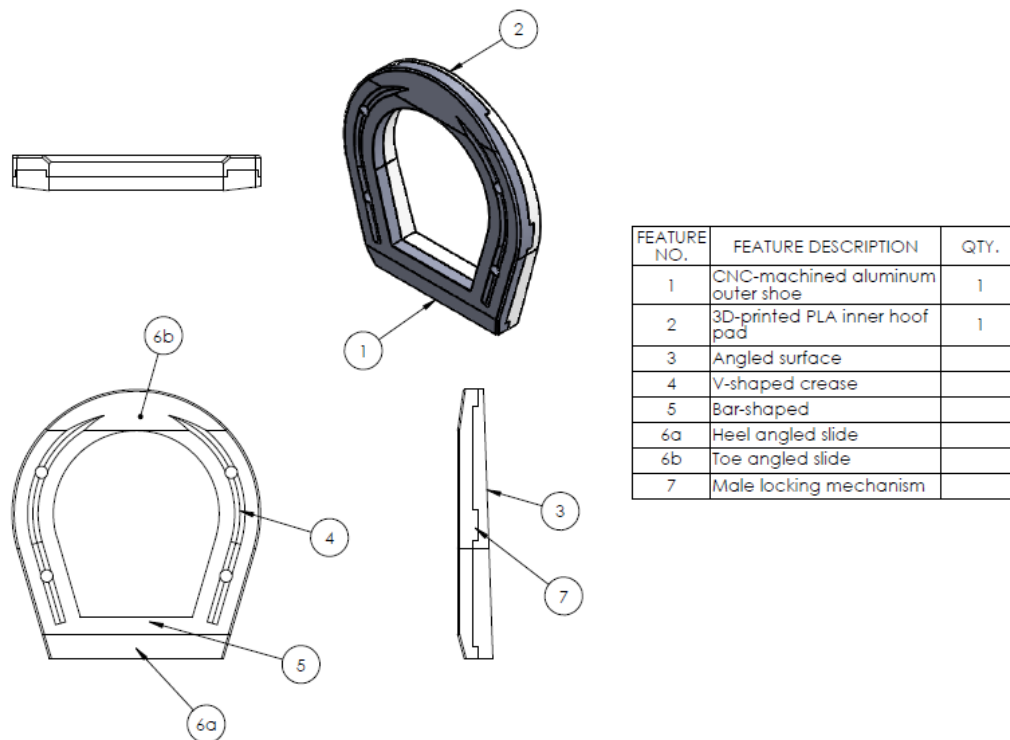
3D cad assembly drawing of the outer shoe and inner hoof pad
